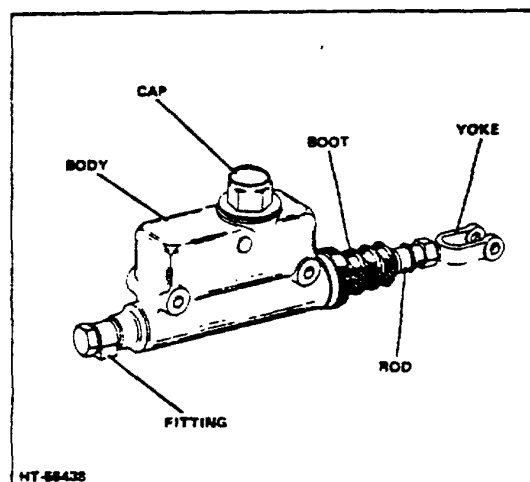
Master Cylinder Assembly And Yoke - Typical
